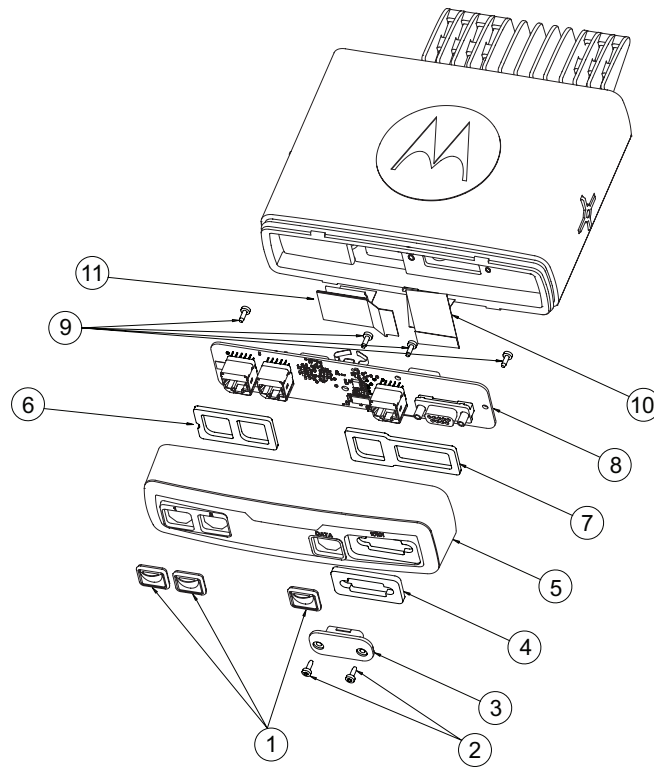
Remote Ethernet Expansion Head – Exploded View
